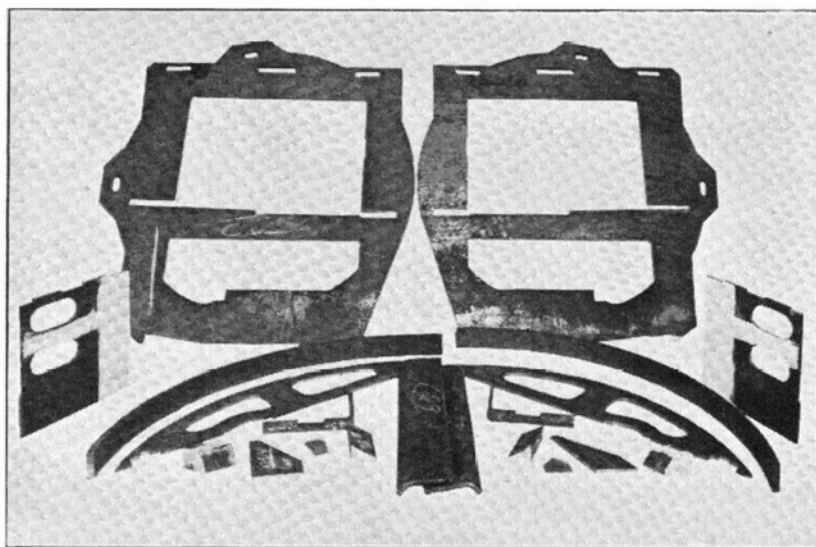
SOME OF THE PARTS PREPARED FOR ASSEMBLY
